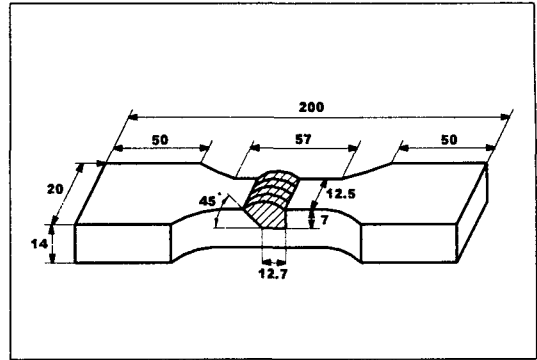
Tensile test specimen of repair weld by direct deposition of weld metal.
